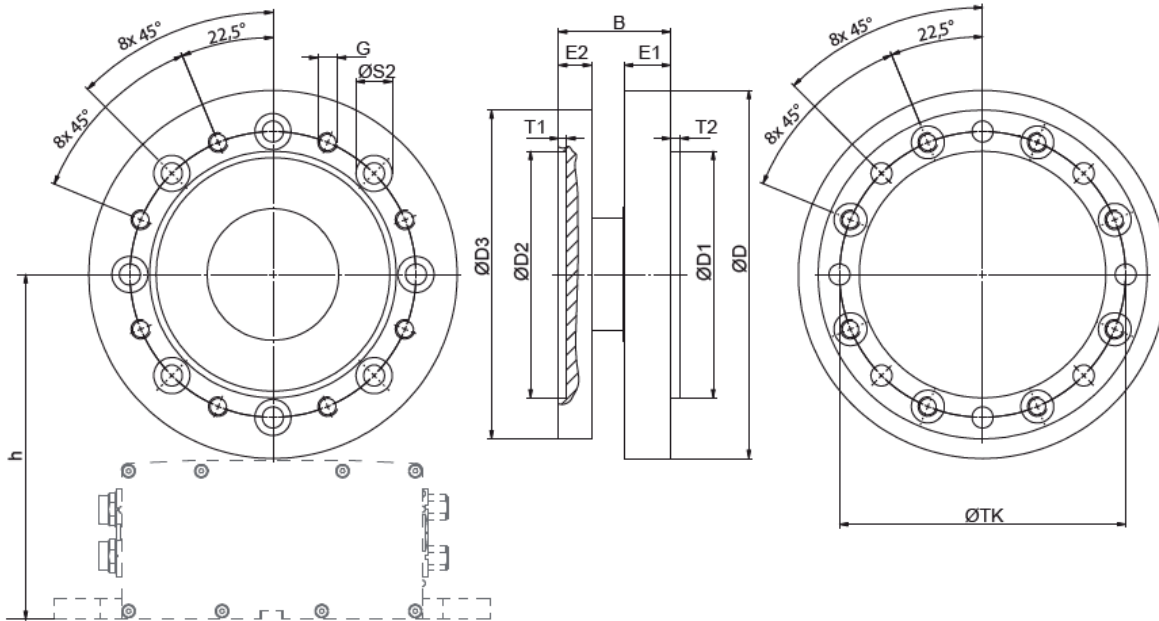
Dimensional drawing of Type 4551A... KiTorq Rotor torque measuring unit
